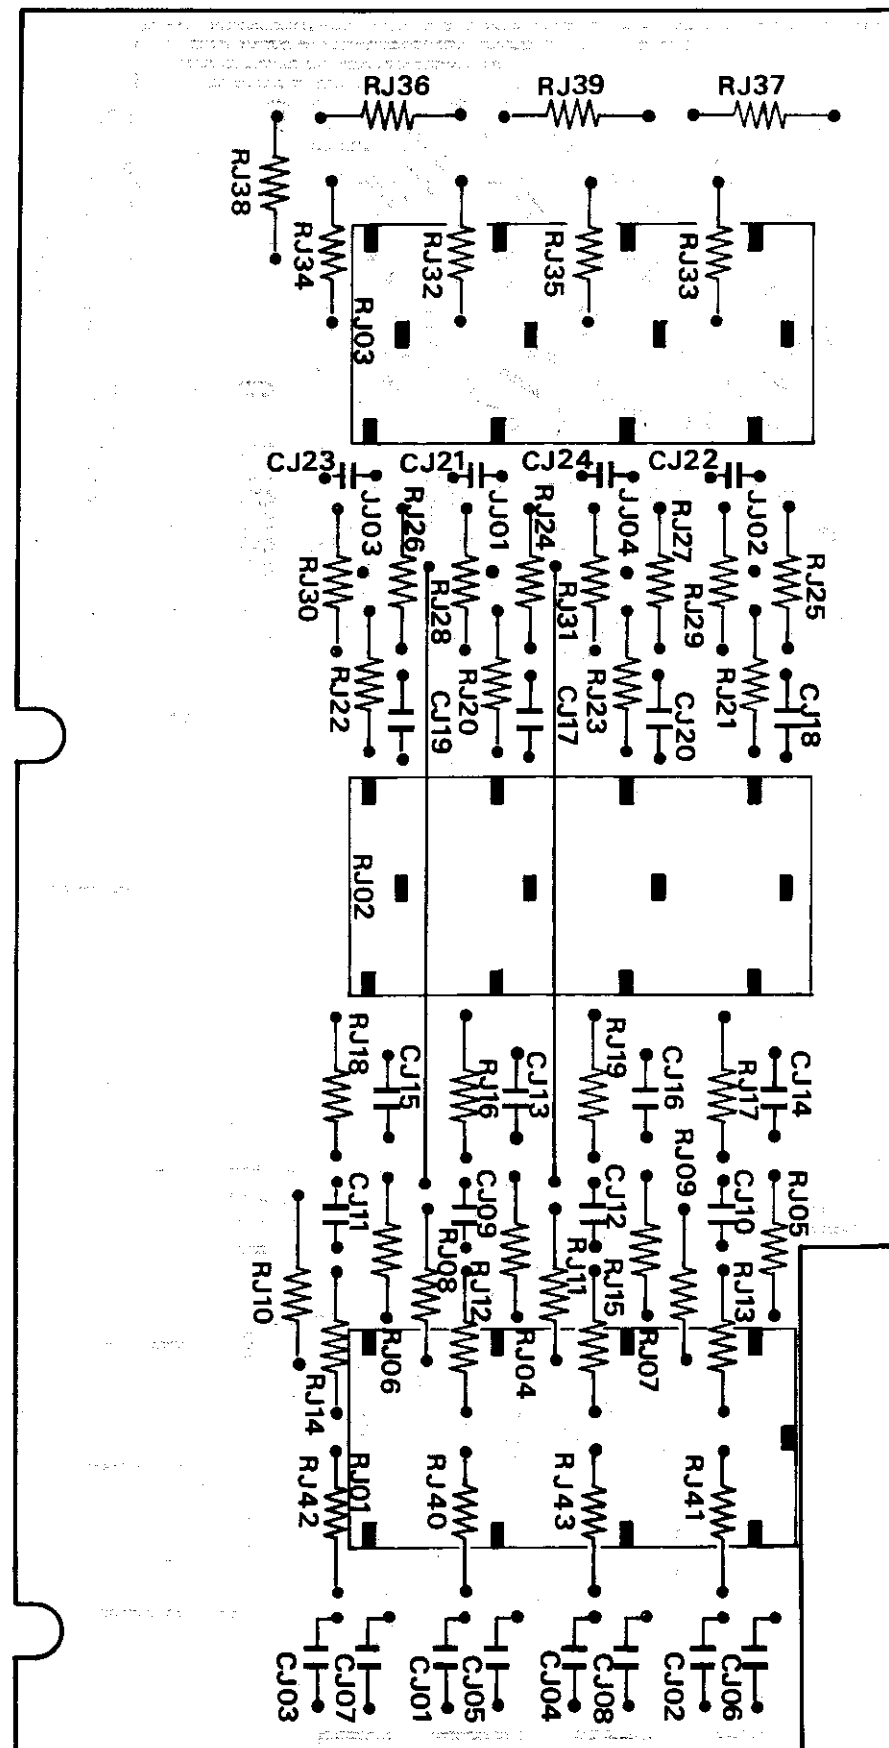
Tone Control Unit Assembly PJ01 Component Locations
